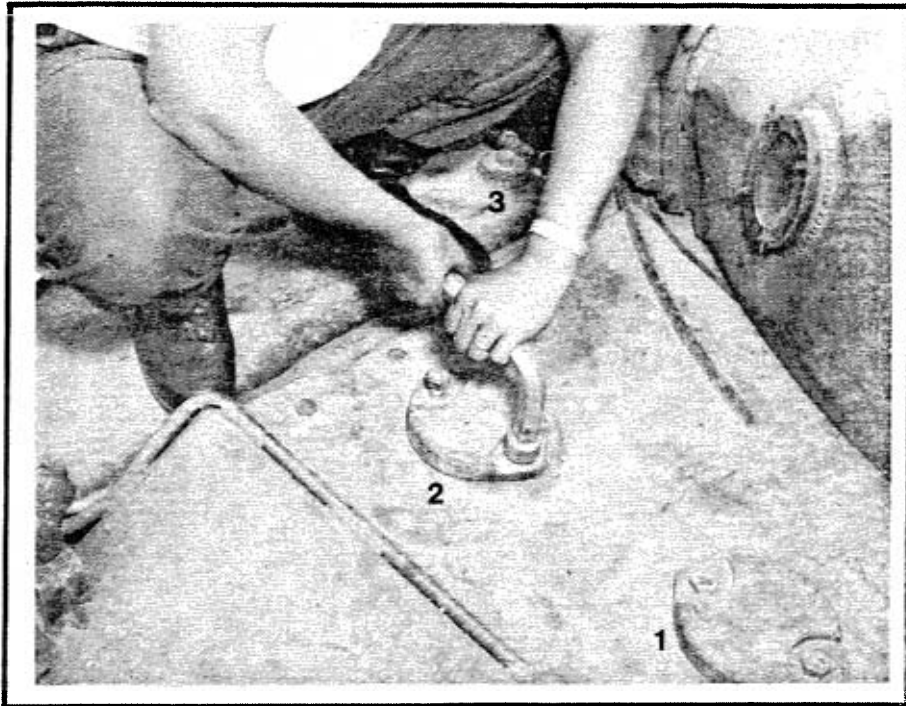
FRONT FUEL TANK ACCESS PLATES
